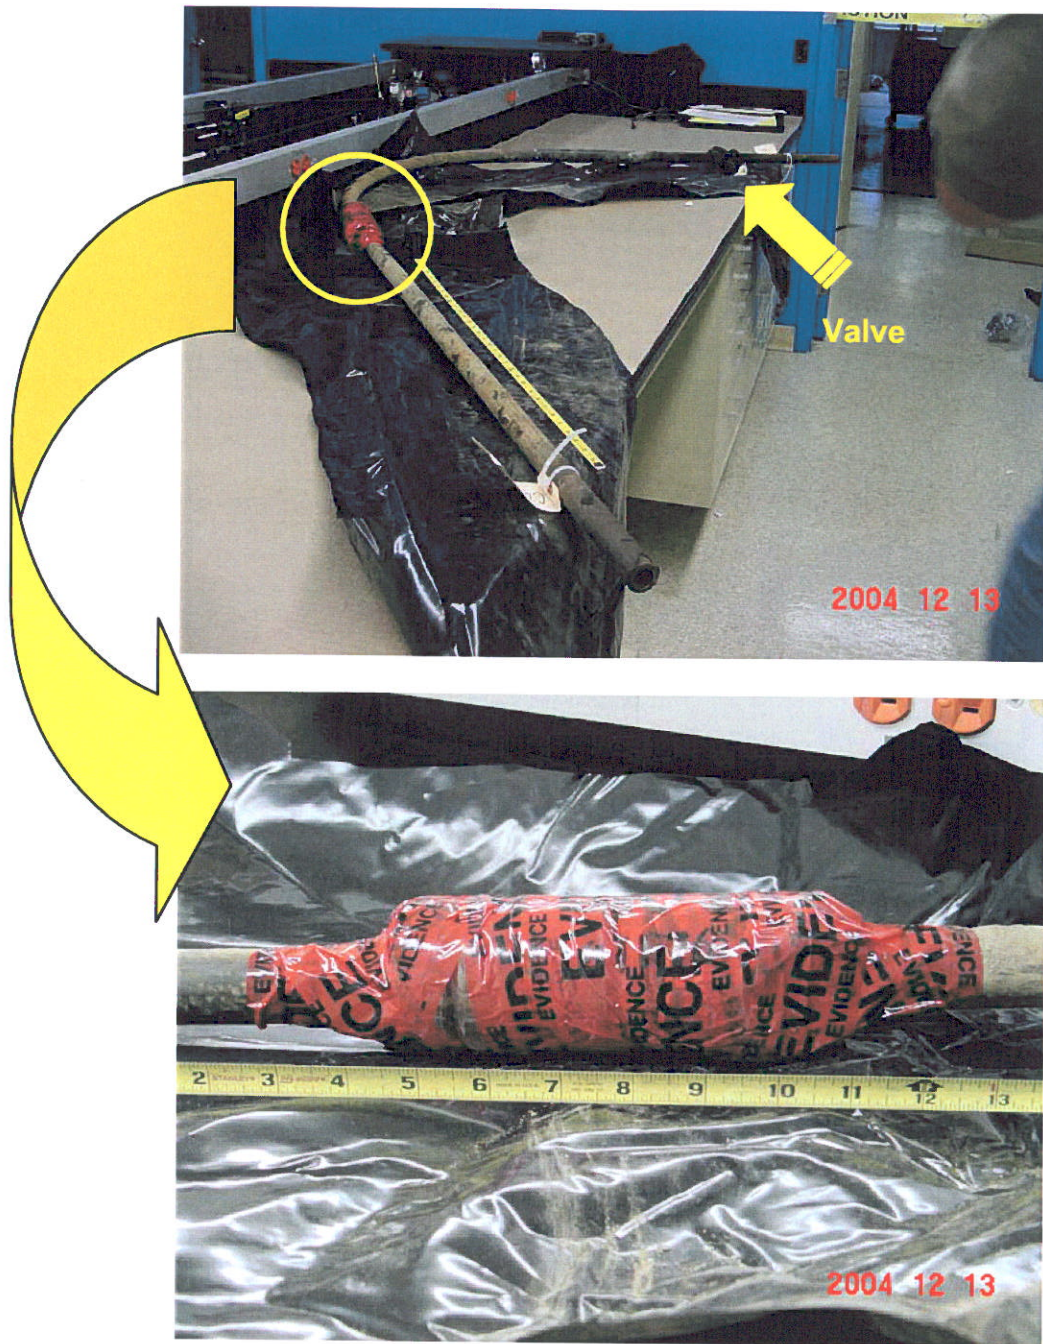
Segment 10 after removal of the protective wrapping for shipping. Lower photo shows the additional protector covering the failure site.
